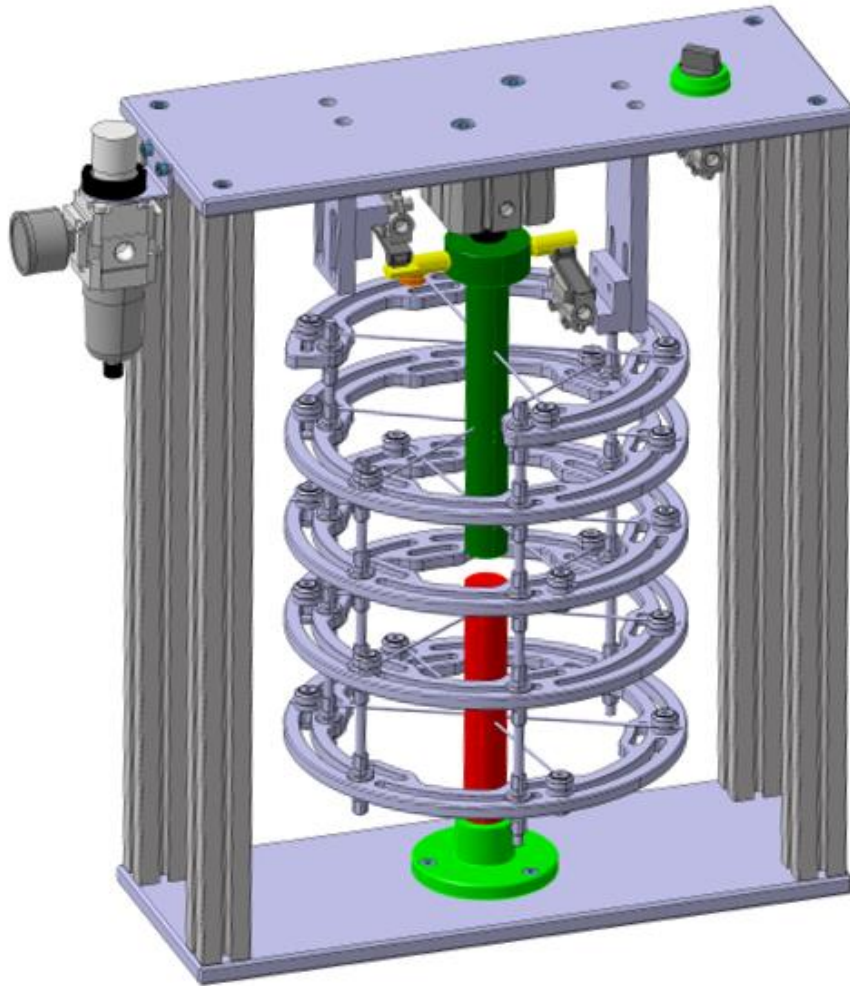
Cyclic testing machine designed by Matěj Homola assembled with an external fixator
